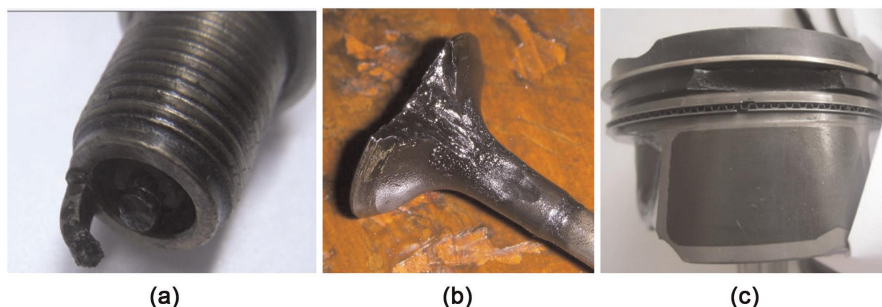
Damaged engine components due to super-knock: a) spark electrode breakup, b) exhaust valve melt, and c) piston ring land broken [14].
